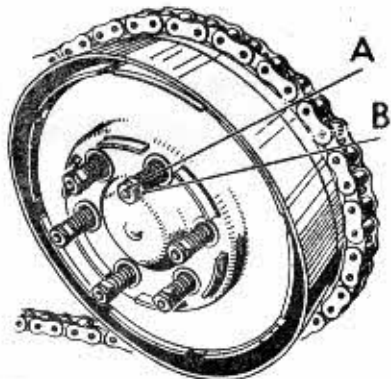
CLUTCH SPRING ADJUSTMENT
